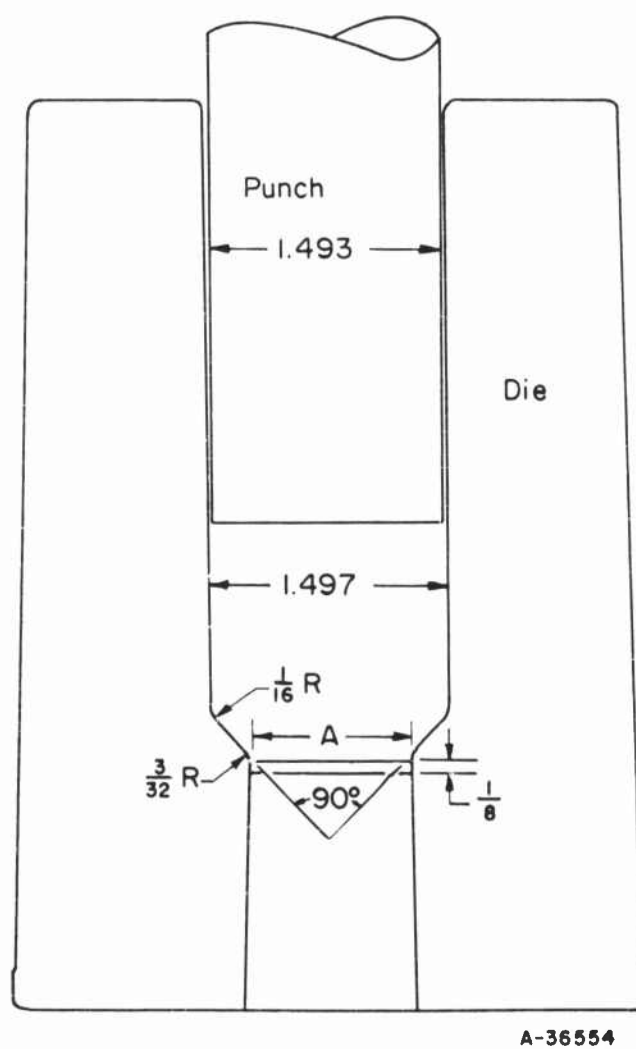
DETAILS OF PUNCH AND DIE FOR FORWARD EXTRUSION
